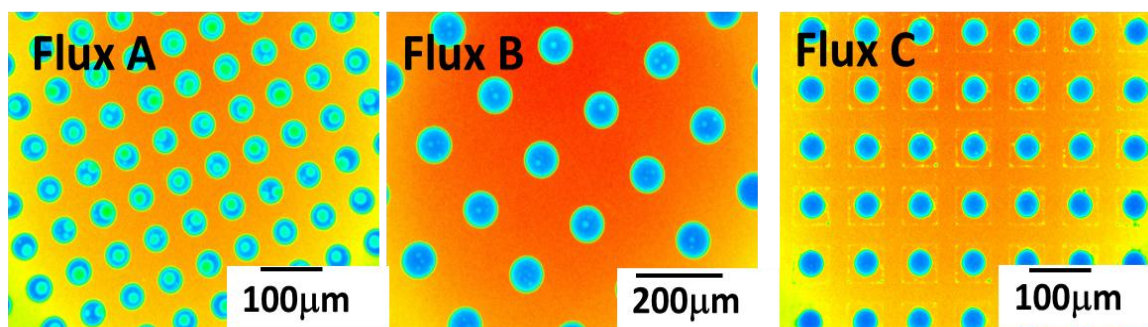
X-Ray pattern showing voids in the composite solder for different flux A. Flux B and Flux C chemistries used in the solder paste.
